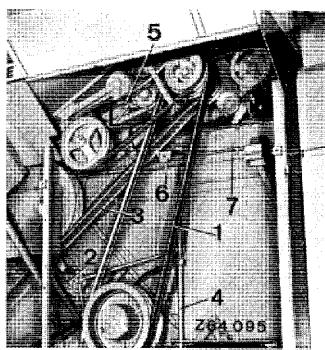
Preparing to Remove Engine, Combine 975 - Left-Hand Side
